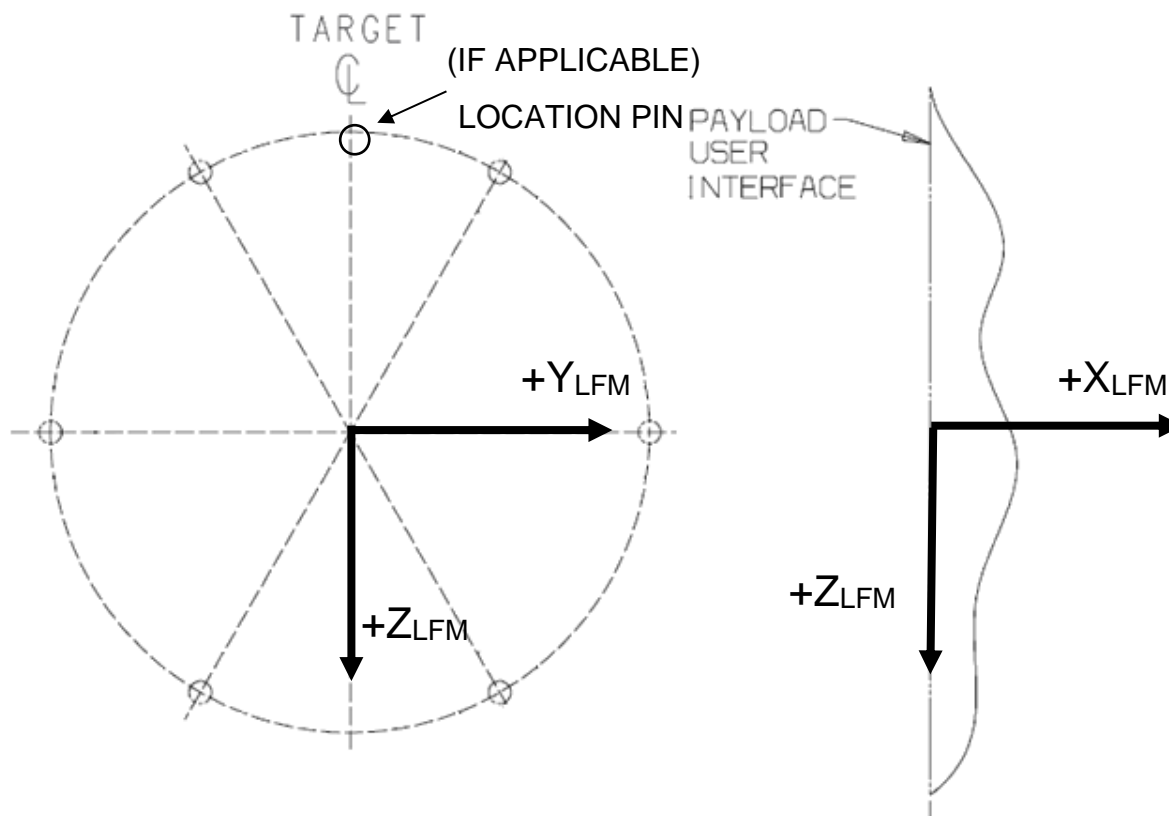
COMMON LARGE FIXTURE MOUNTING COORDINATE SYSTEMS
